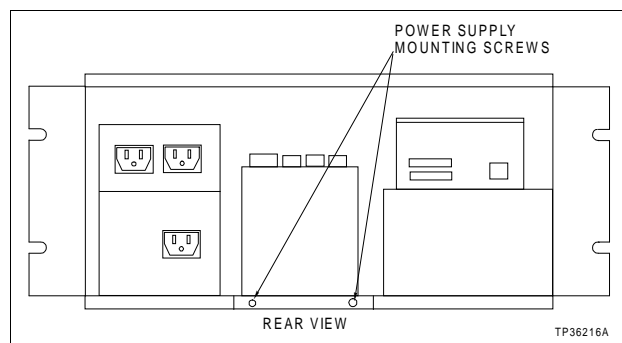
Main Power Supply Removal for Driver Cabinets
